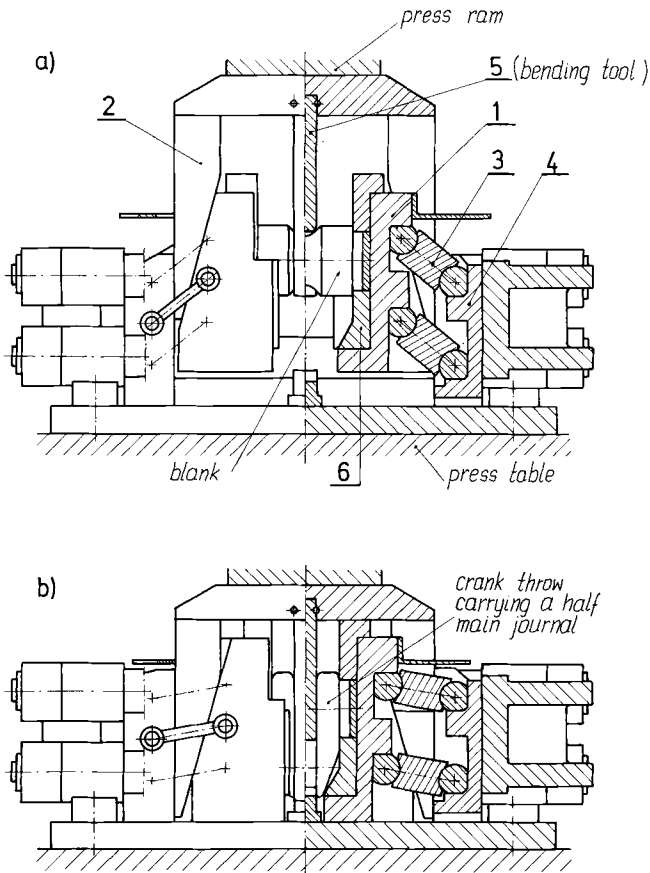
Forging device adapted to the forging of crank throws carrying half journal on both sides (schematically shown): (a) View shows the device in the open position when the bending tool and the blank have touched each other (left hand side of figure shows elevation; right hand side shows sectional view); (b) View shows the device in the closed position at the end of the working stroke (left hand shows elevation; right hand side shows sectional view).
